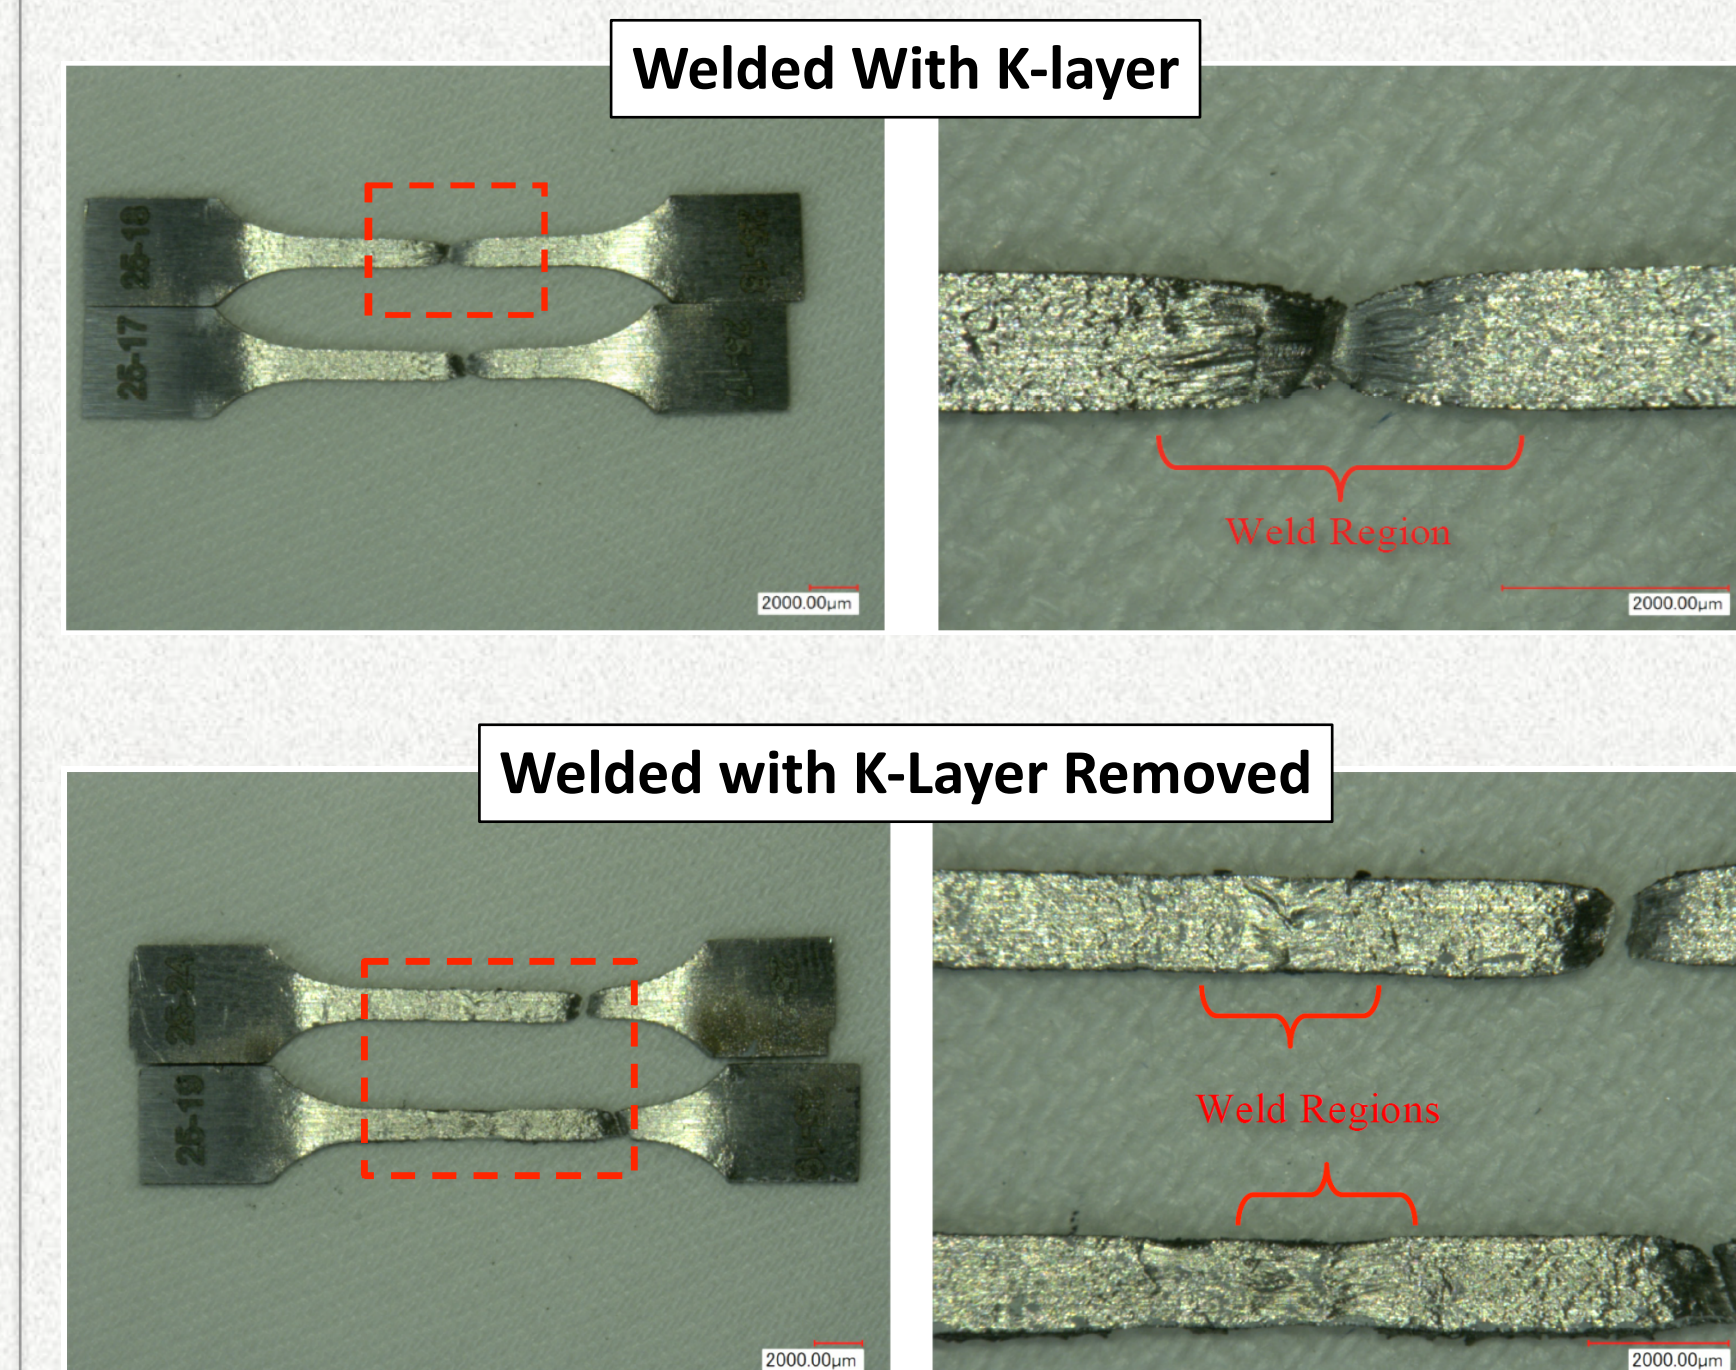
Tensile specimens after testing with K-layer present during welding (top) and with the K-layer removed before welding (bottom).
